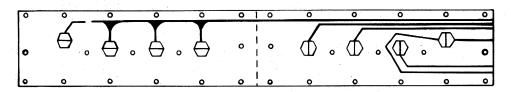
Full-Size Partial Drawing of the Flex-Circuit Layout Showing the Trace which Must be Cut if the Auto Reset Option is Desired.
